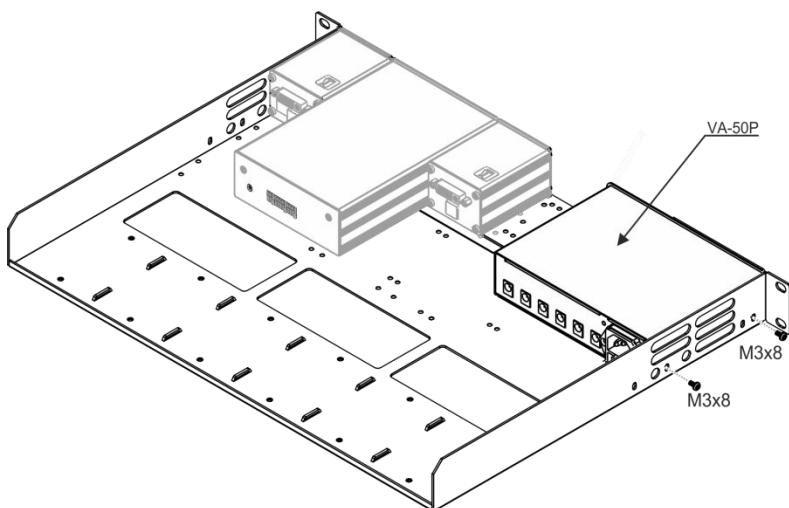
Mounting a 6.5" Device via Screws on the RK-6PS Side Panel
